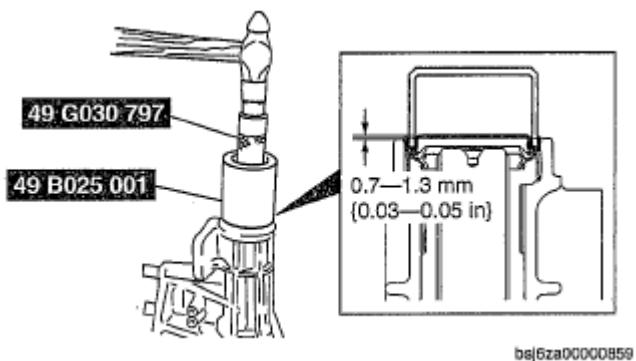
Position For Installing Extension Housing Shroud To Extension Housing
